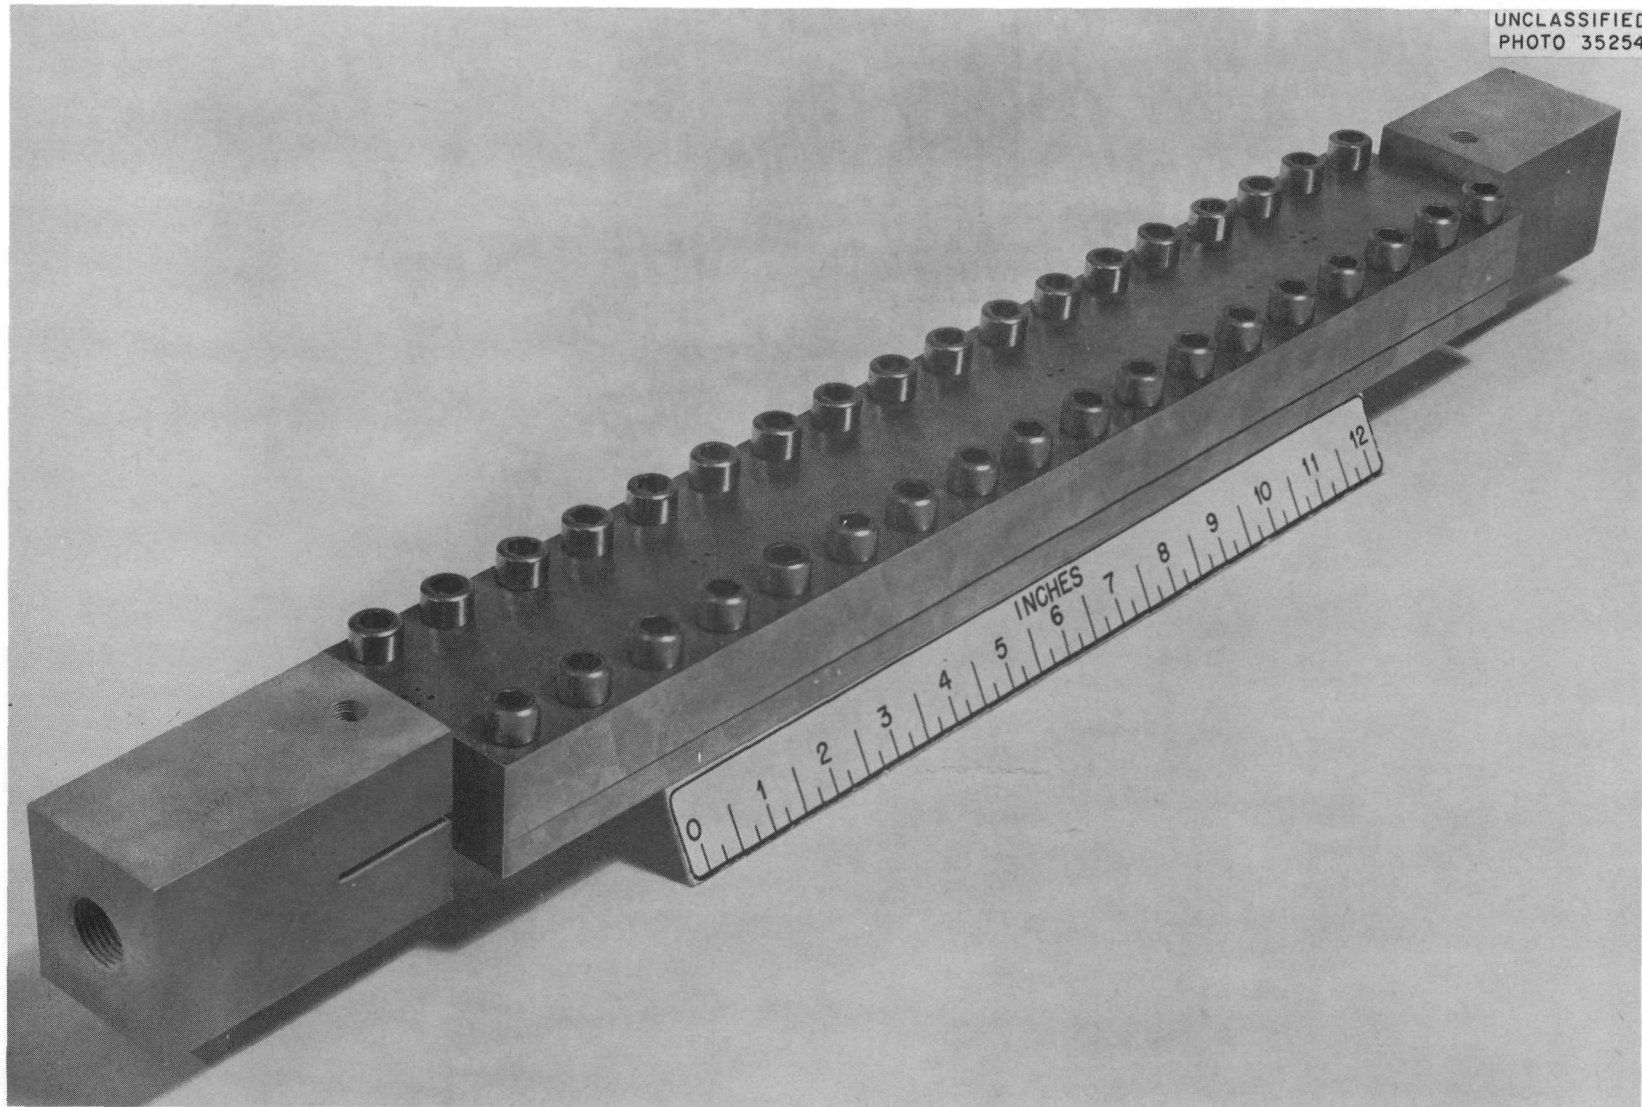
Completed Aluminum Test Section Assembly. Pressure taps may be seen at tops of end blocks.
